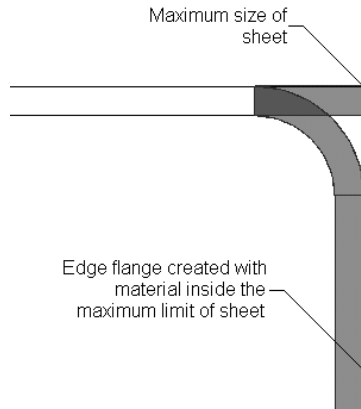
Edge flange created with the Material Inside button chosen
